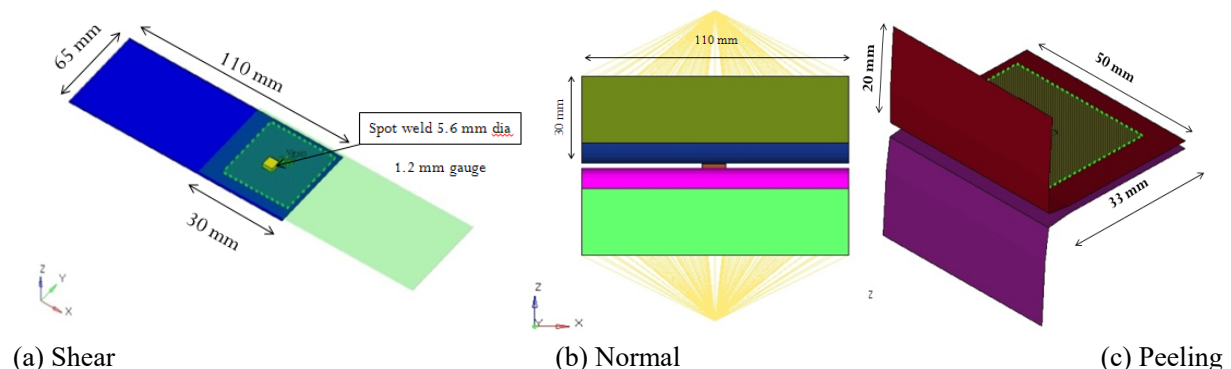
Geometry of model specimen for 2-D weld simulation (sheet thickness 1.2 mm)
